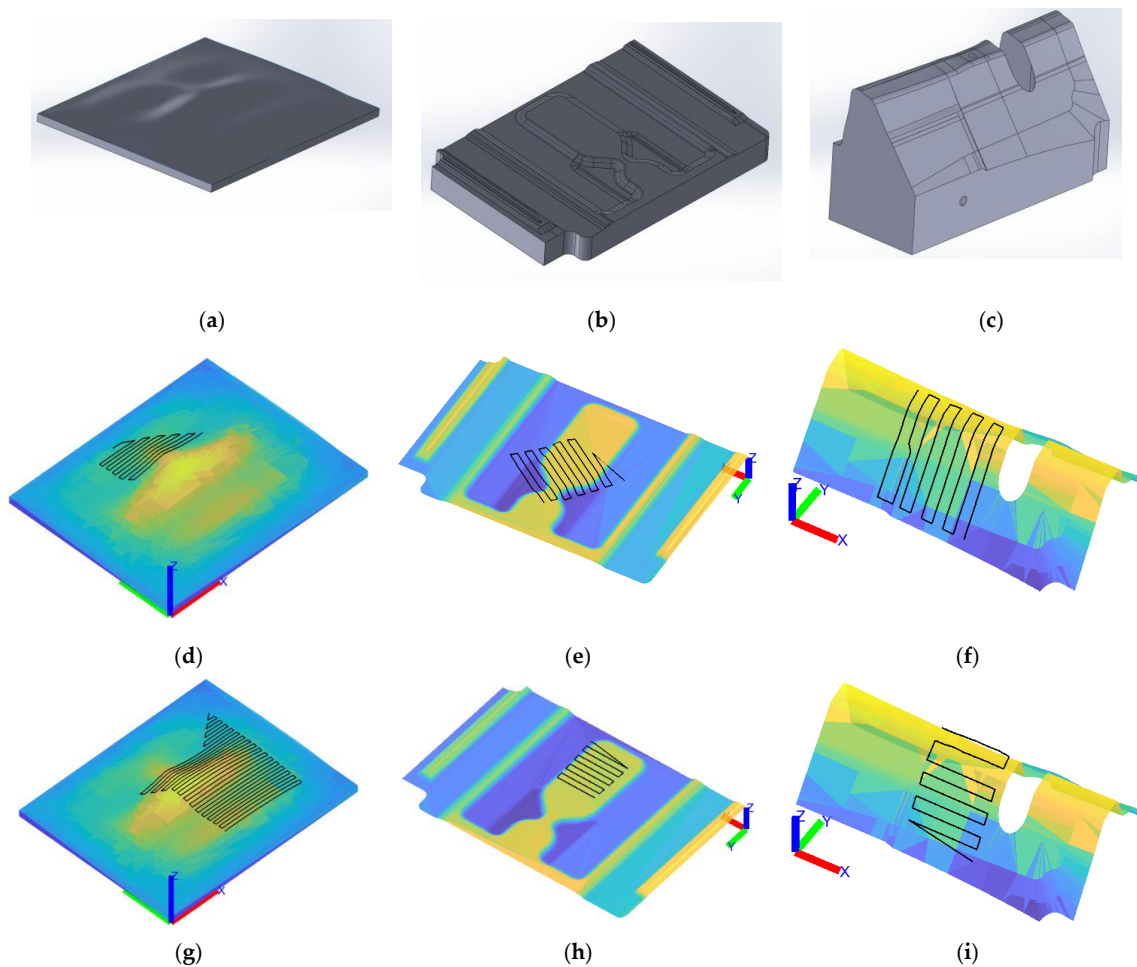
Three-dimensional model of a workpiece: (a) Workpiece 1, (b) Workpiece 2, (c) Workpiece 3, and the machining paths across the surface of the workpiece: (d) 1A, (e) 2A, (f) 3A, (g) 1B, (h) 2B, (i) 3B; surface color is coded by the surface point height (blue—low value, yellow—high value).
